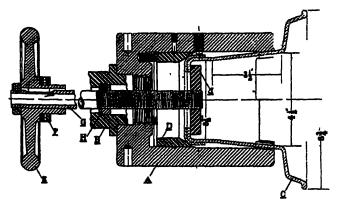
SIMPLE FIXTURE FOR THE INTERNAL GRINDING OF PRESEND-STREL HUBS
